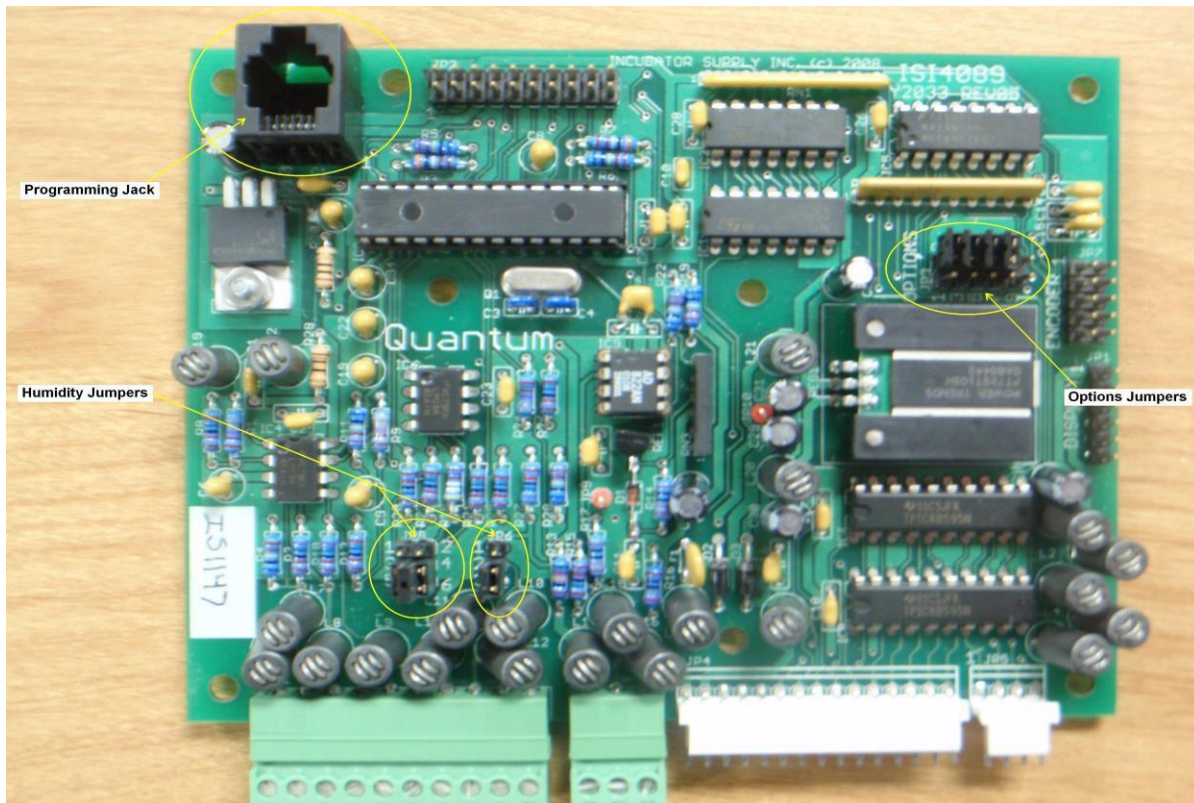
VORTECH CPU BOARD JUMPER LOCATIONS
